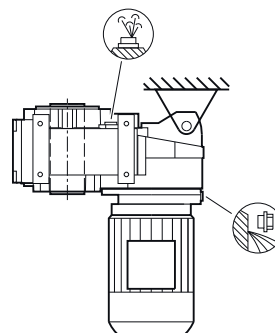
Mounting positions for helical gearbox DF/ZF flange-mounted design, sizes 49 - 189 and DZ/ZZ with housing flange, sizes 49 - 129
